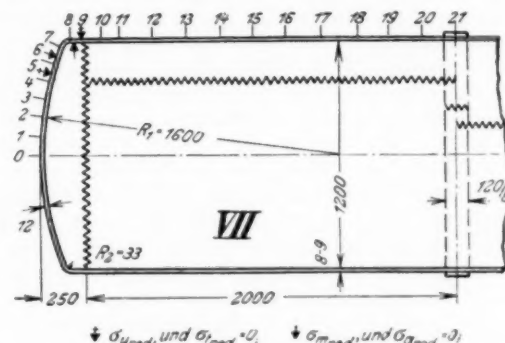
ELECTRICALLY WELDED VESSEL WITH BASKET-SHAPED CROSS-SECTION OF HEAD
